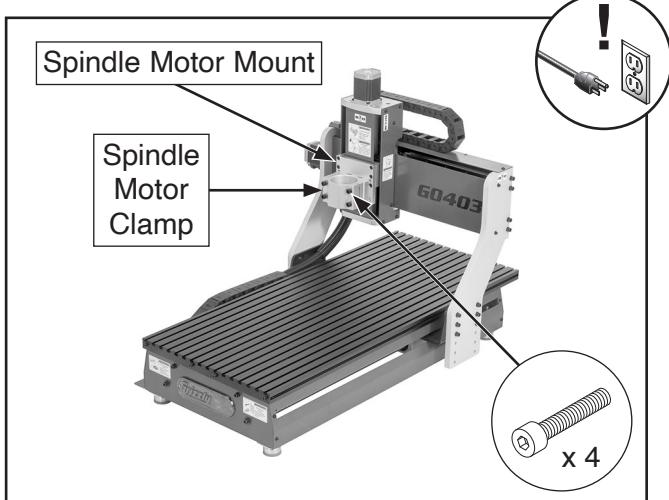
Location of spindle motor clamp cap screws on Model G0403 spindle motor mount.
